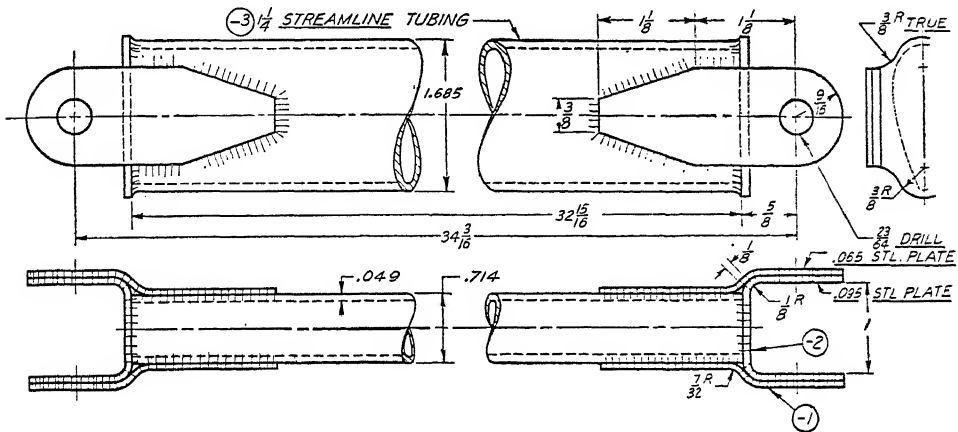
Weld Assembly. Prob. 12-21.
